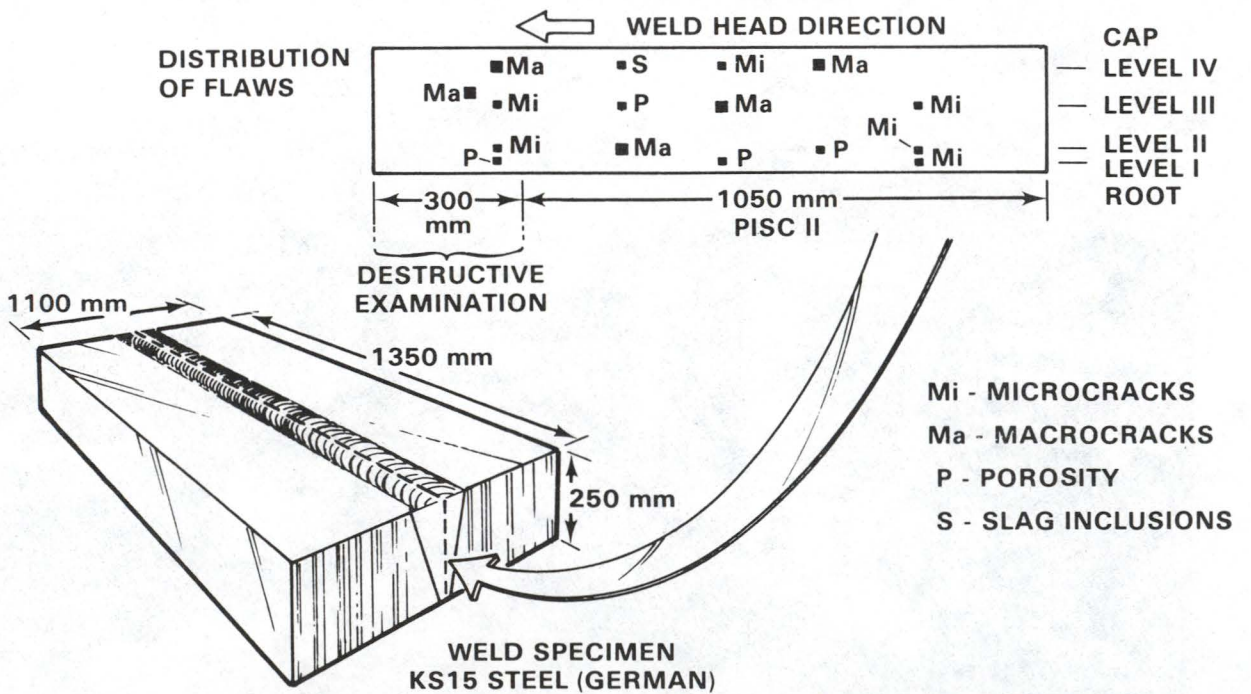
Demonstration Specimen - AE Detection of Weld Flaws.
